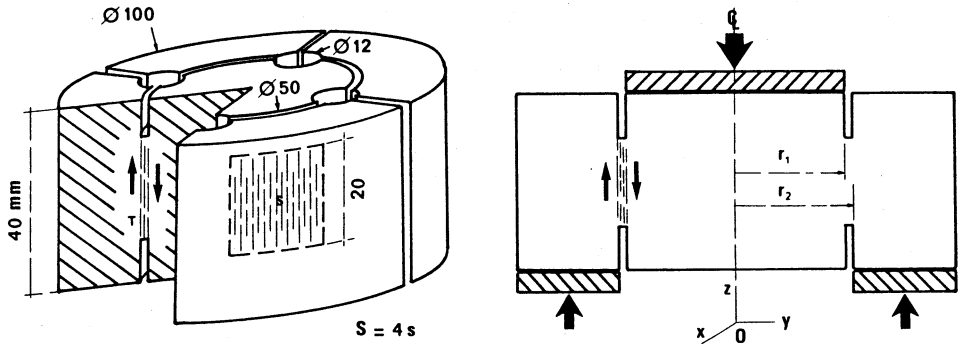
Geometry and optimized size of the proposed shear test specimen.
